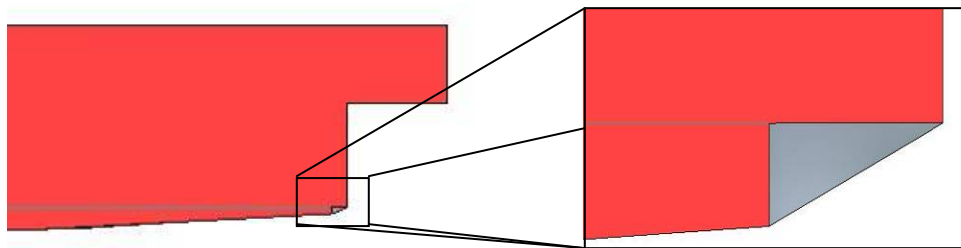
Center Plate Insert Connection and Weld Detail
